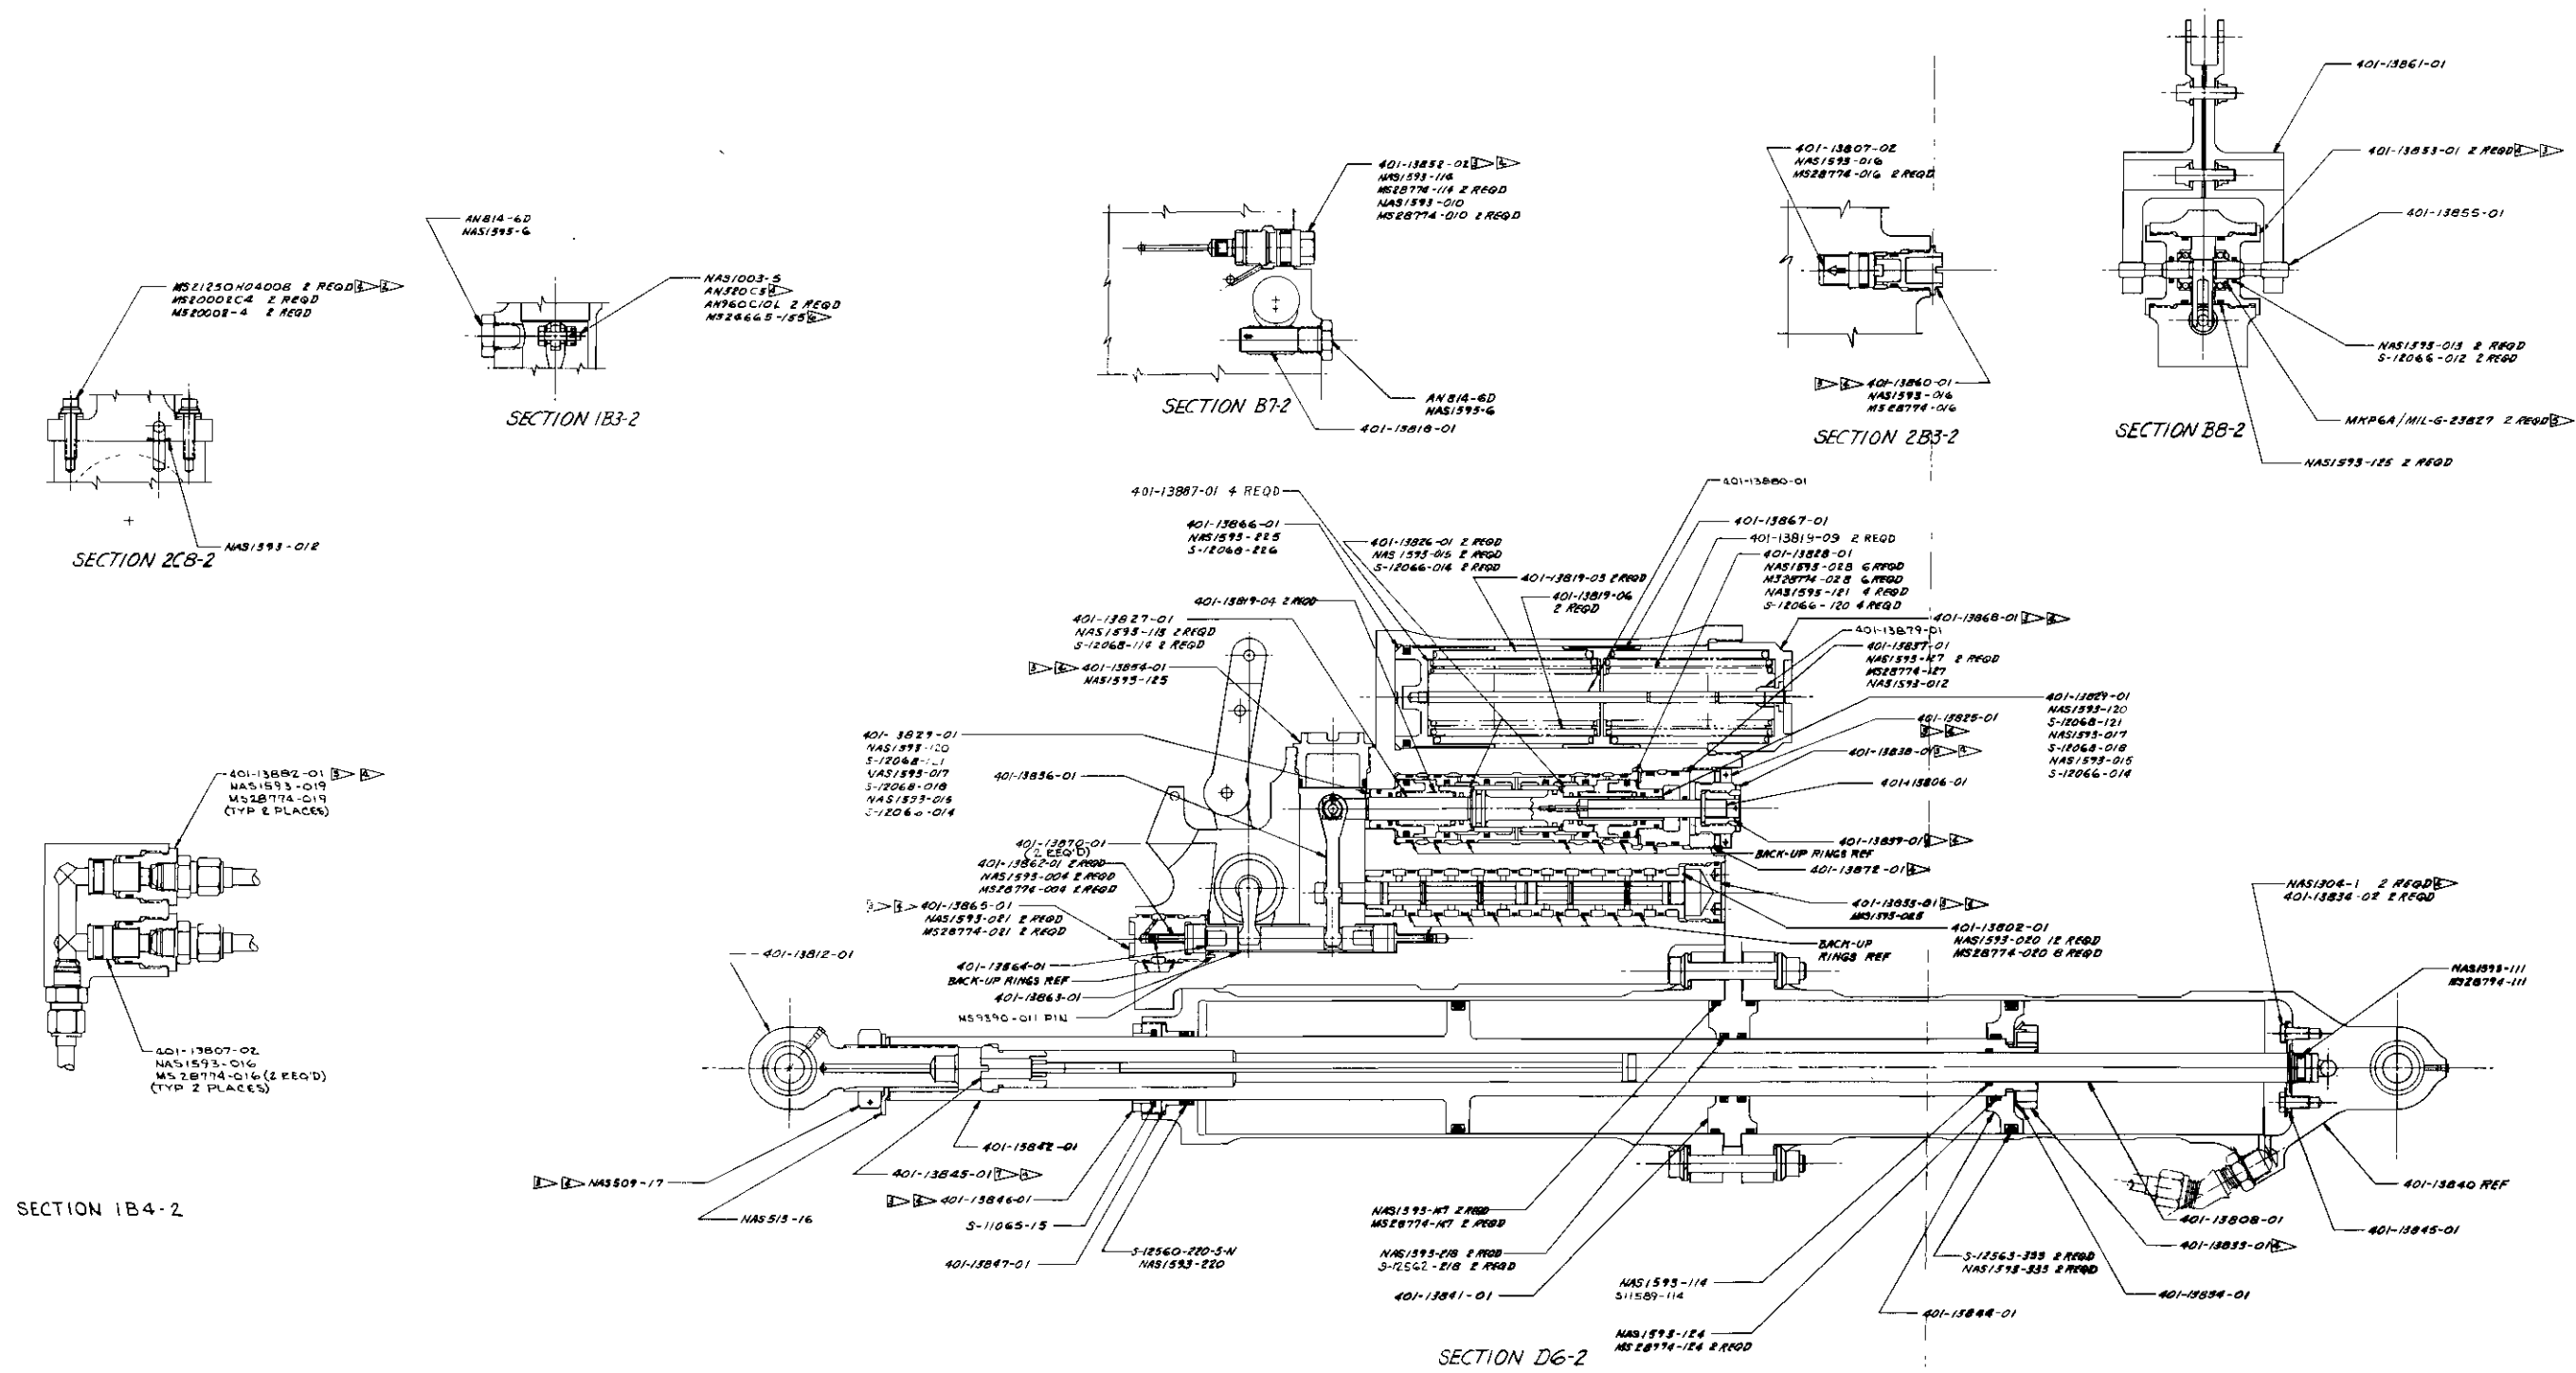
SIMPLEX ASSEMBLY (SHEET 1 OF 2)
